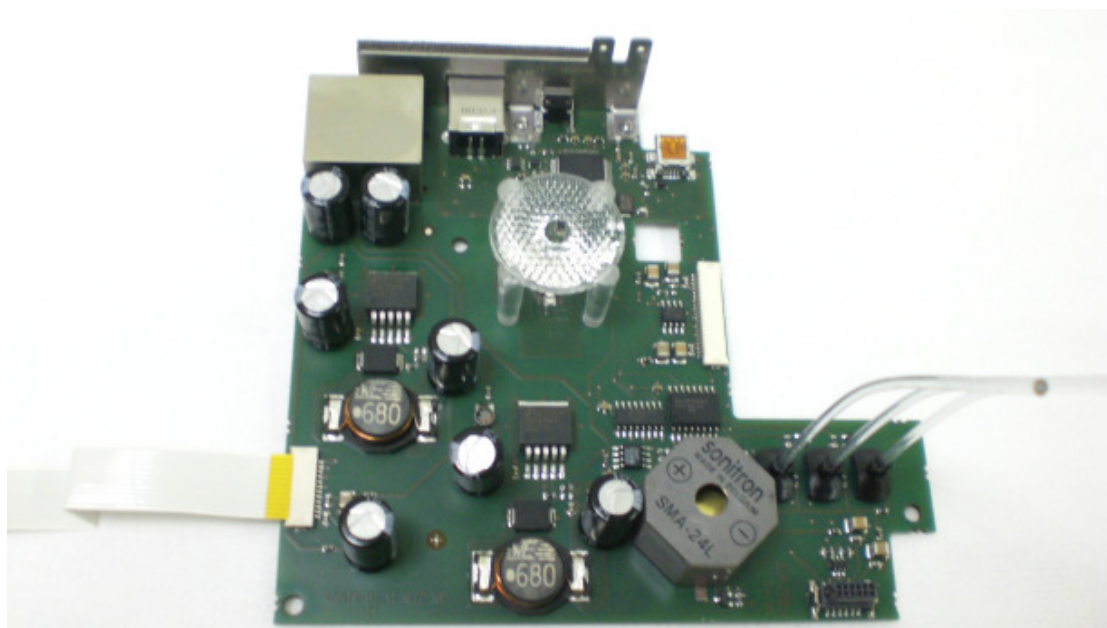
Antenna with Card Reader, RJ0479:389.25 RevA, Side with components
